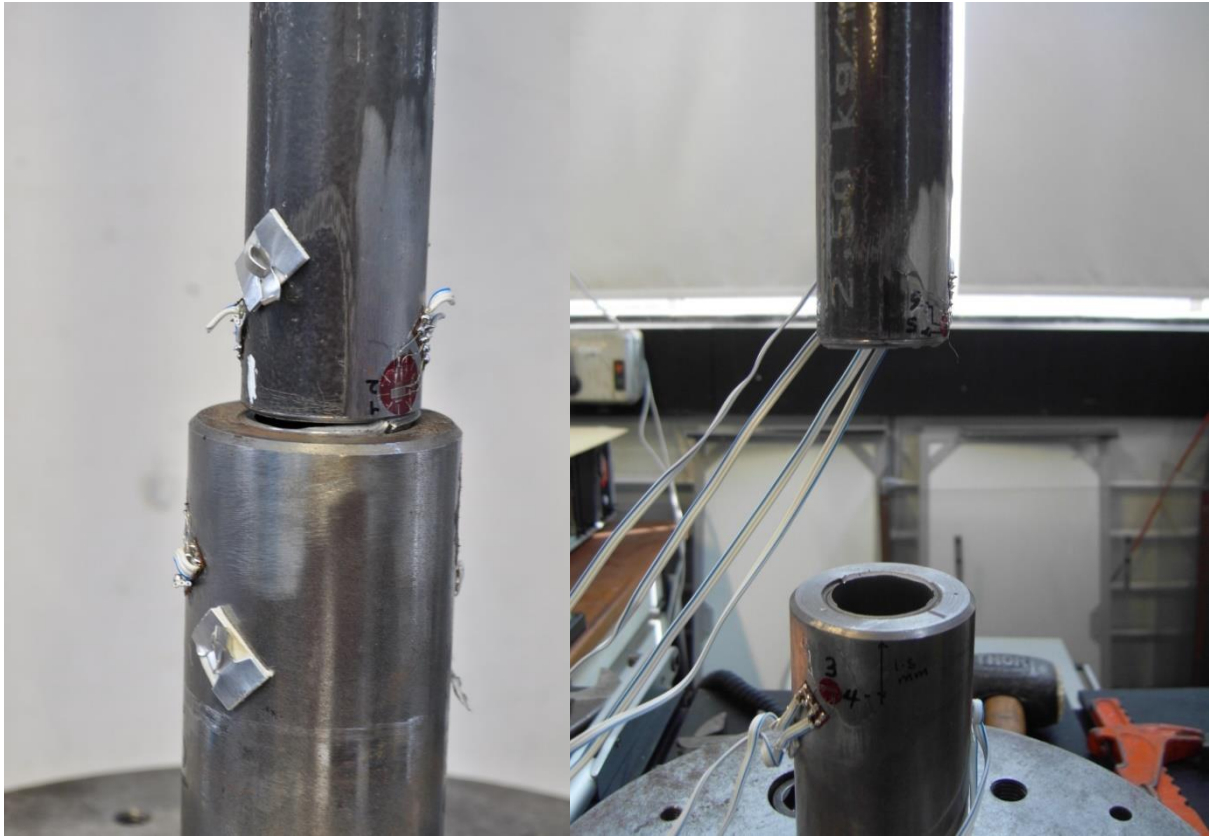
Failure in 1-inch API threaded pipe connection.
